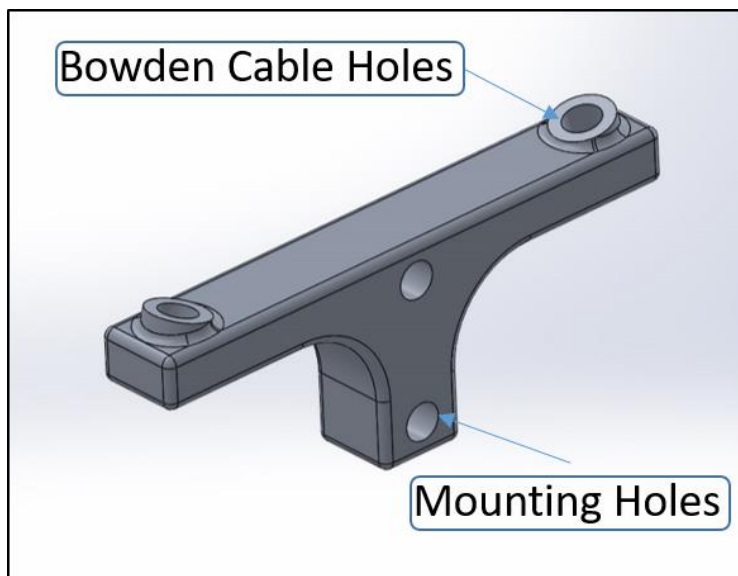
The Joint Cable Block is the distal end of the Bowden cable housing. The angled holes on the top of the block allow the cable to stay tangent to the ankle pulley, reducing friction in the transmission.
